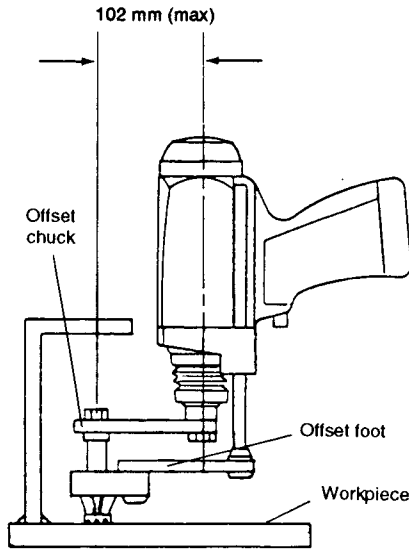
Typical offset assembly used when stud arc welded fasteners must be welded below an obstruction
